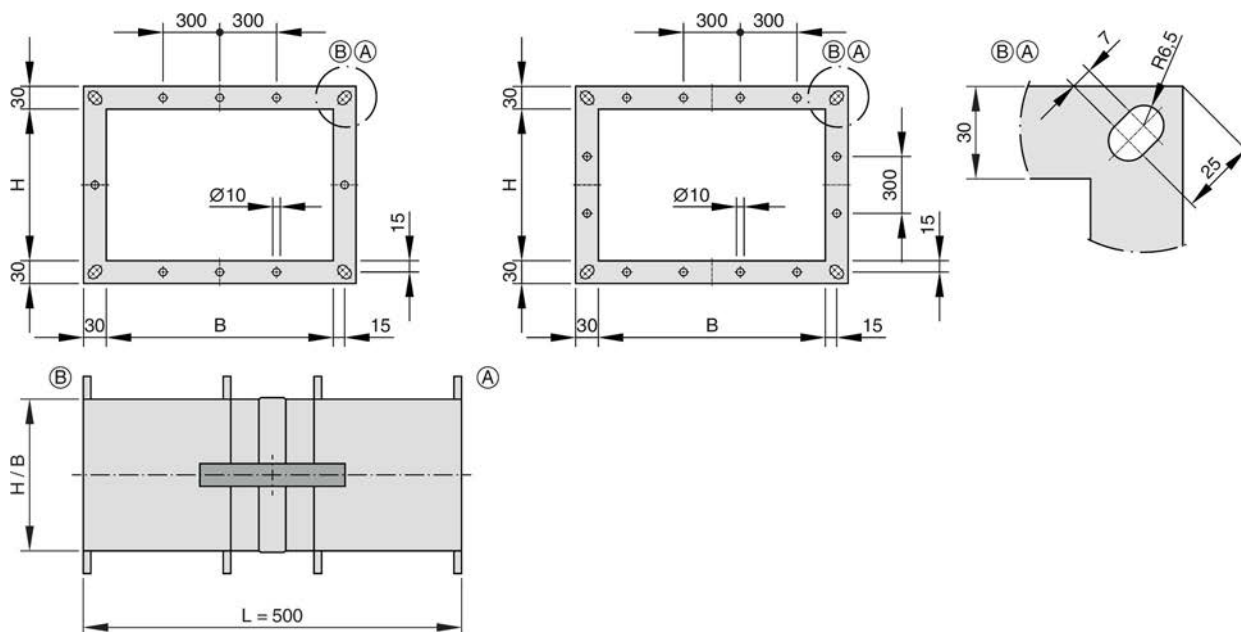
Flange holes $L = 500$ mm – uneven and even number of holes
